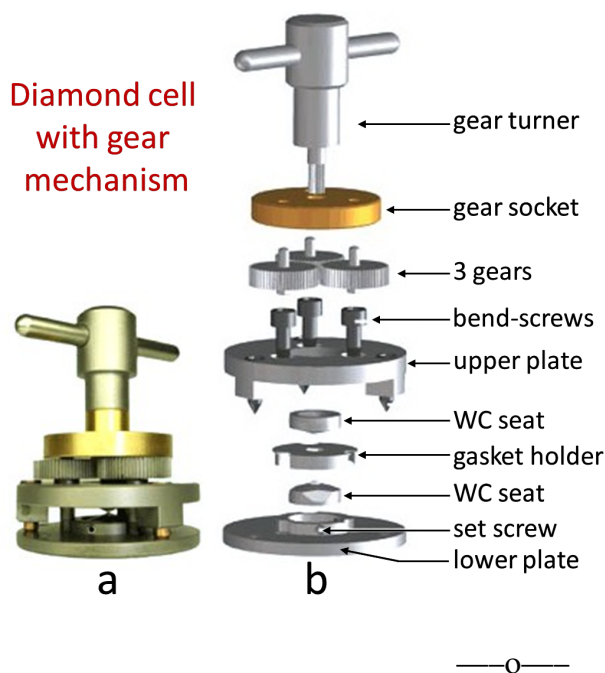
Gear mechanism for the diamond anvil cell.
